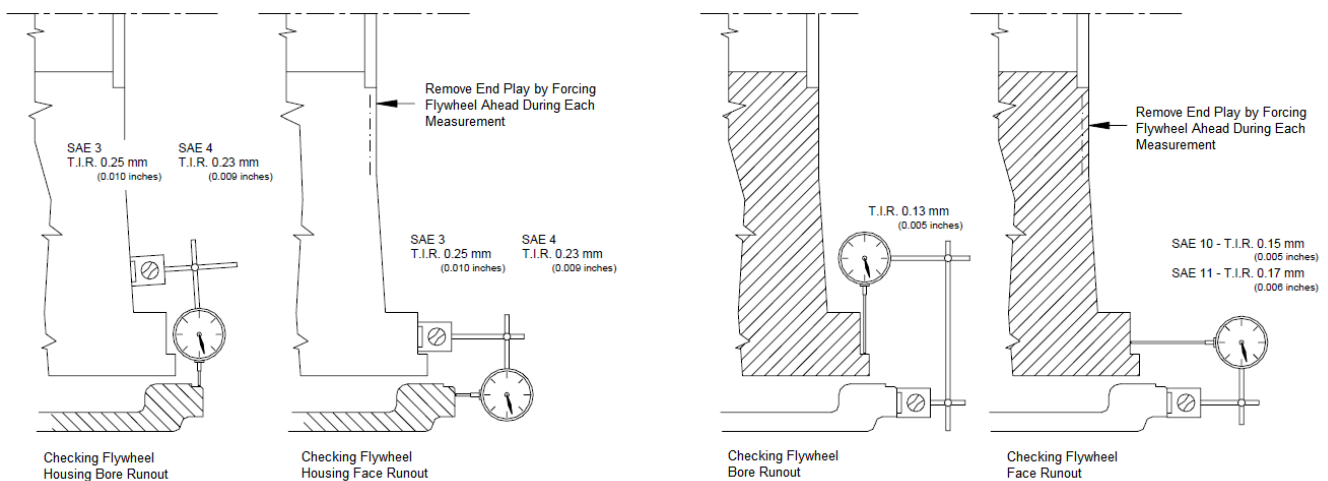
Checking that the flywheel runout is within SAE tolerances.
